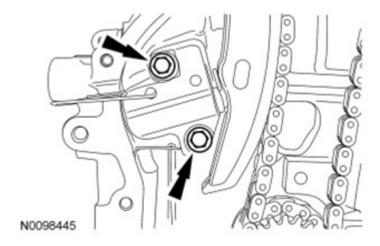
Locating Timing Chain Tensioner Bolts Courtesy of FORD MOTOR CO.
